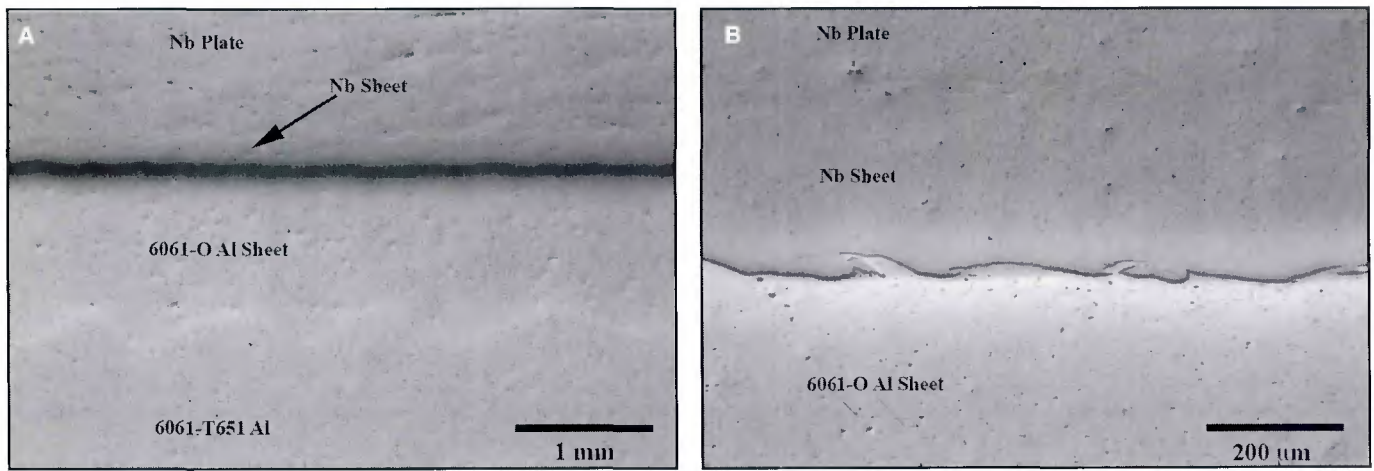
Micrographs. A — Showing the entire weld cross section; B — the Al-Nb and Nb-Nb welds taken at an orientation perpendicular to the explosive wave front for a multiple weld plate with a 1.0-mm Al interlayer.
